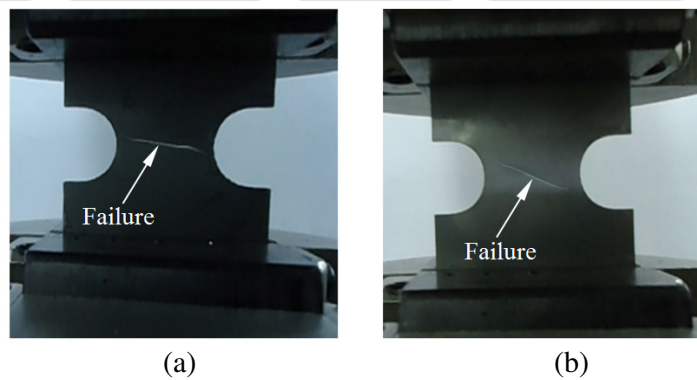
Failure pattern of in-plane plane-strain forming specimens as single sheet: (a) DDQ steel, and (b) SS 316L
